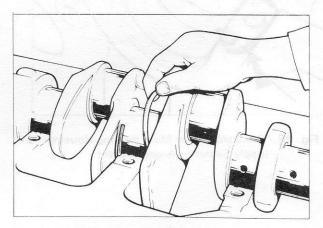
Installing Center Main Bearing Upper Thrust Washers
